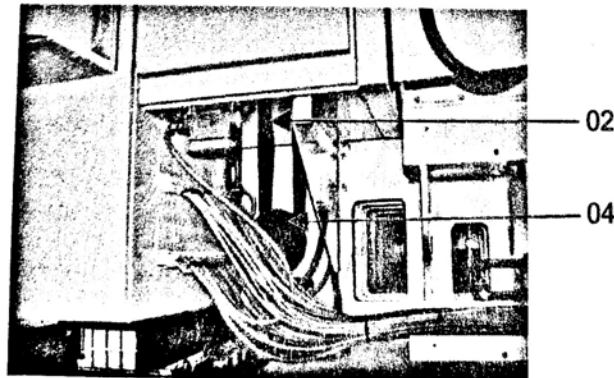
SupraPlus endless rope on bolt in machine base, left and back of machine
